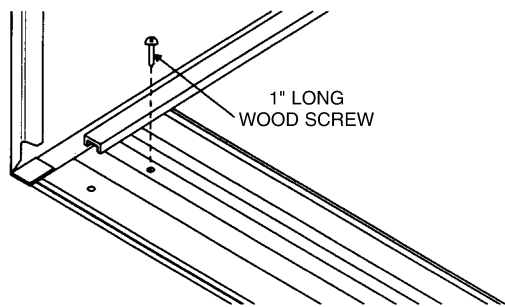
SECURING BOTTOM RAIL OF CABINET
